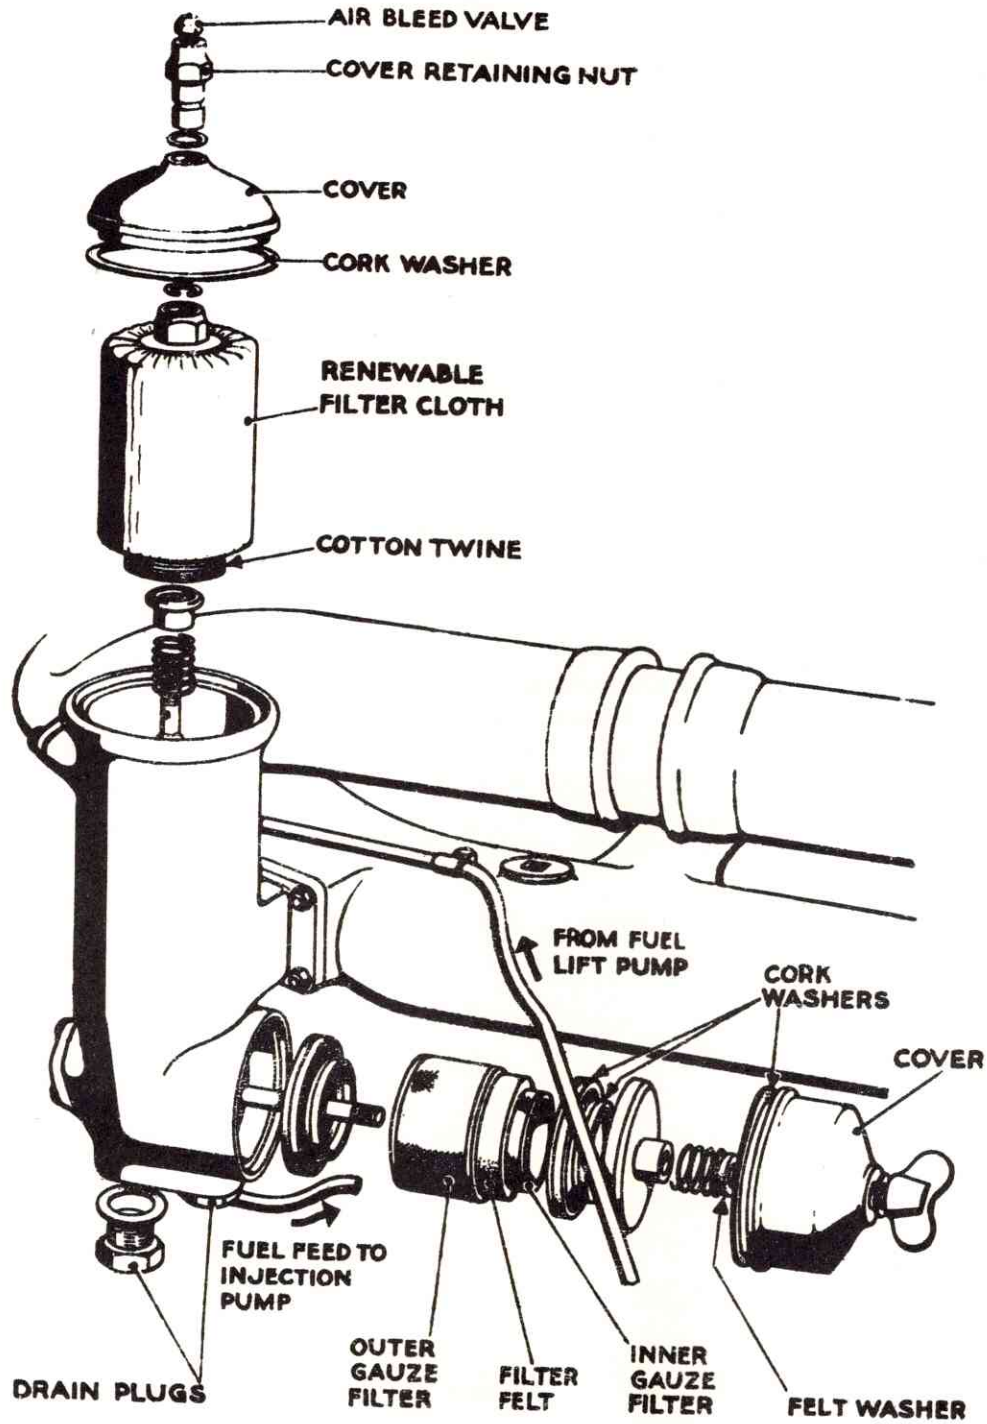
Fuel Filter - Leyland Type (twin chamber)
